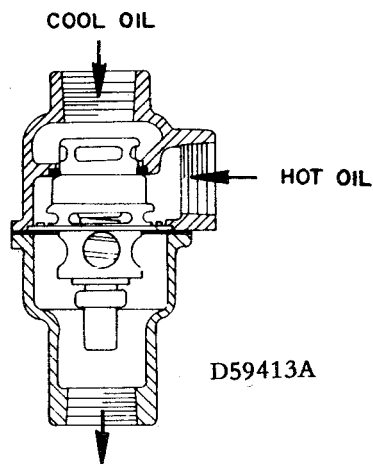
THERMOSTATIC MIXING VALVE
